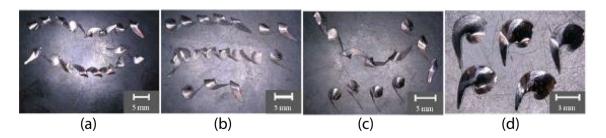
Al-chips formed while using (a) dry cutting, (b) cooling with compressed air (8 bar) through the tool (c) liquid CO<sub>2</sub> (60 bar) from the work piece side (d) liquid CO<sub>2</sub> (60 bar) from tool side through the cooling channels [163]
